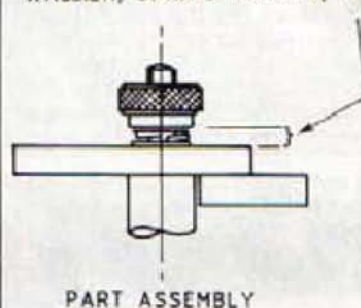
LATHE CUTTER HEIGHT GAUGE
